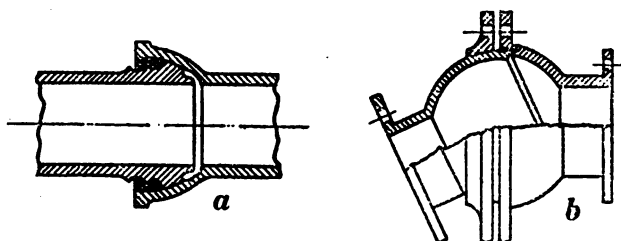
SPECIAL FORMS BALL AND SOCKET JOINTS.
